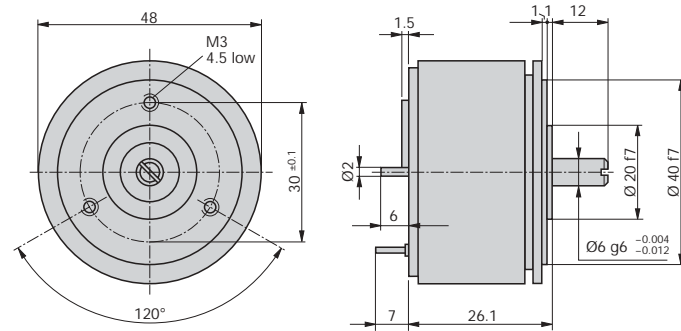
KINAX 2W2 with special drive shaft at front and at rear. At front: \varnothing 6 mm, length 12 mm. At rear: \varnothing 2 mm, length 6 mm.
